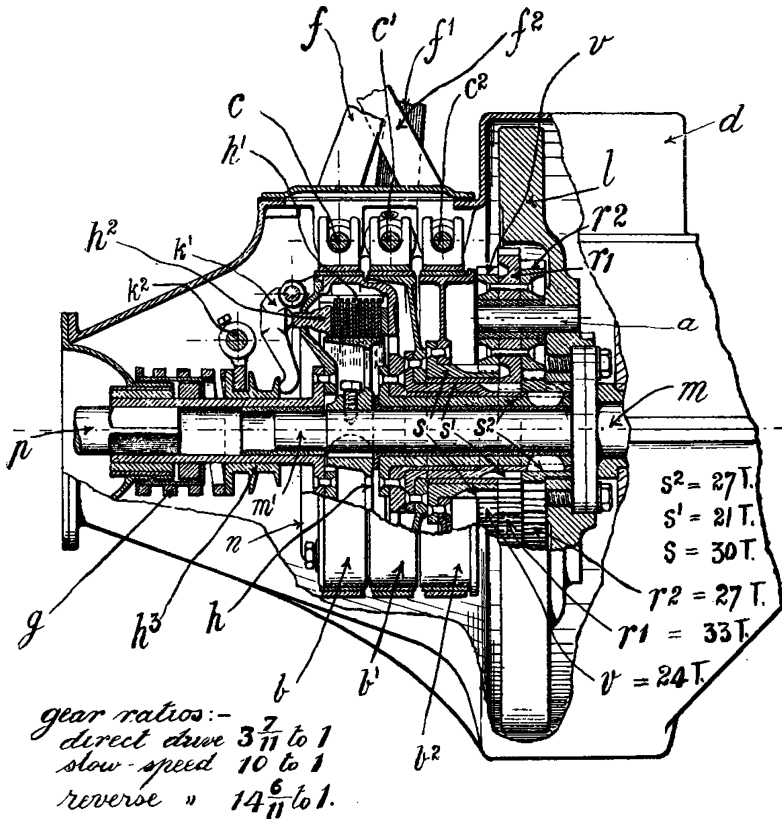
Epicyclic gears gearbox of Ford model T of 1908. One reverse, one reduced forward speed and a direct drive are available.
